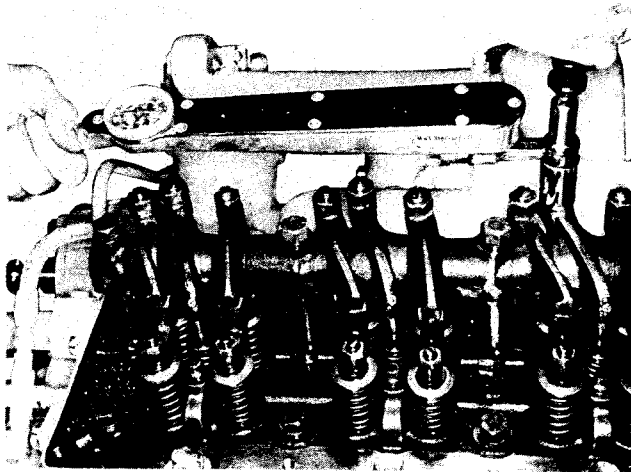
, (V114115). Tightening adjusting screws locknut
